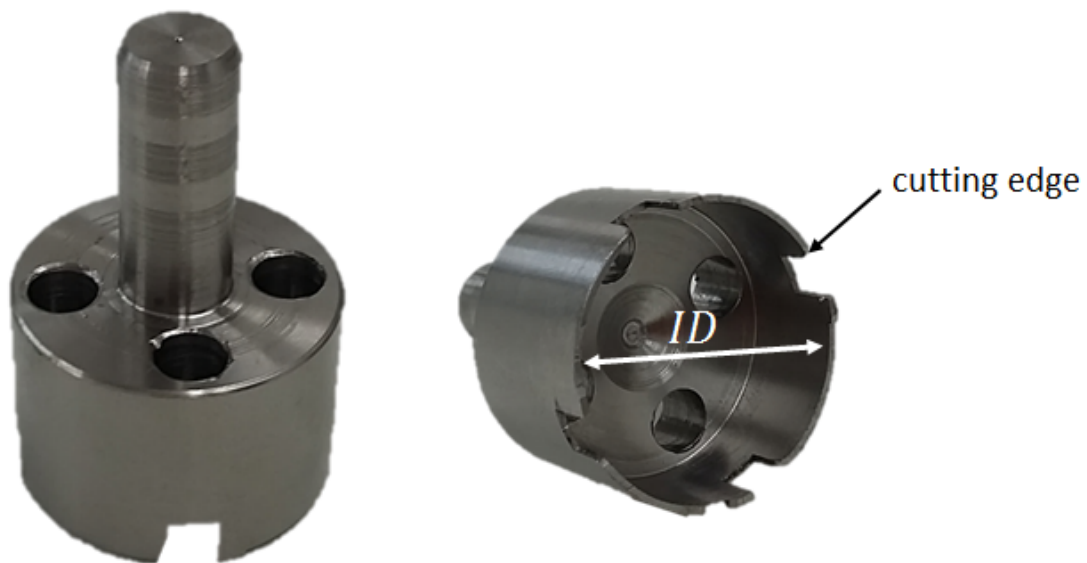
Photographs of the custom manufactured corer used to core out 28 mm diameter cylindrical cancellous bone specimens.
